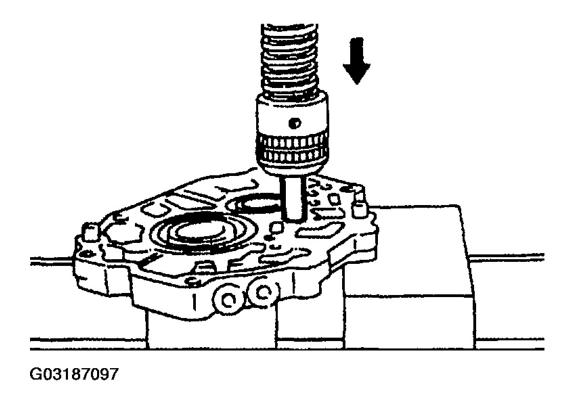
Removing Reverse Idler Gear Shaft Courtesy of MAZDA MOTORS CORP.
